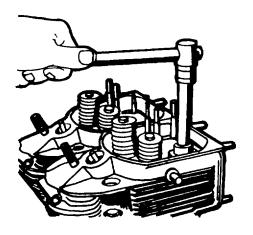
Fitting Screw Plugs into Cylinder Head
